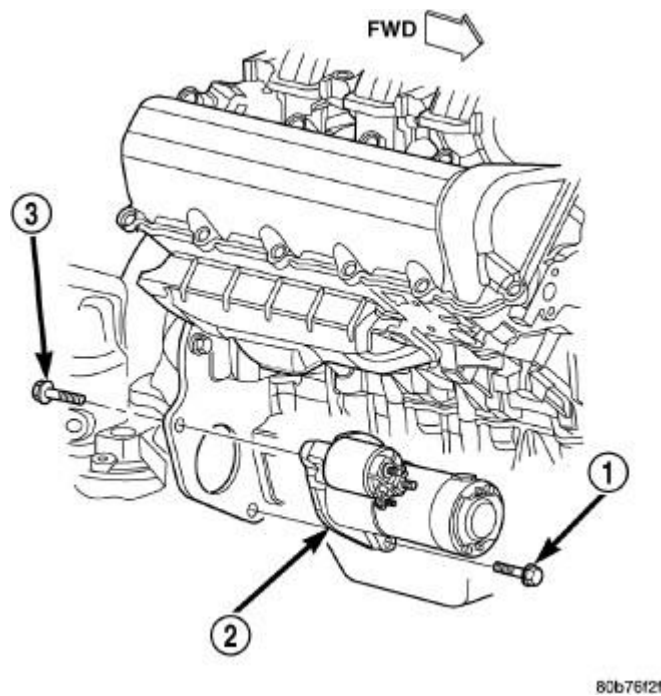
Starter Motor - 3.7L/4.7L Engine
